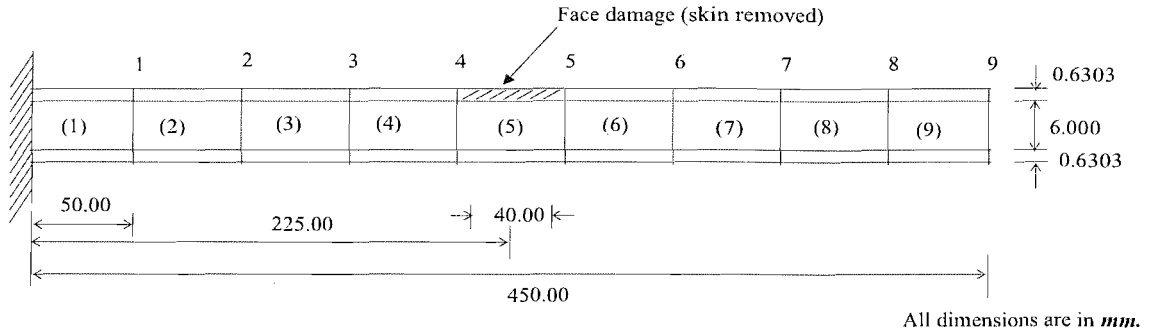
Geometrical dimensions of composite sandwich beam specimen and damage location.
